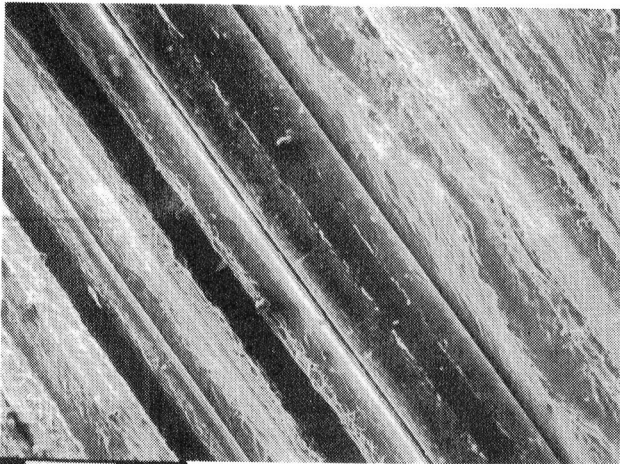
Longitudinal fracture surfaces of as-fabricated specimens.
